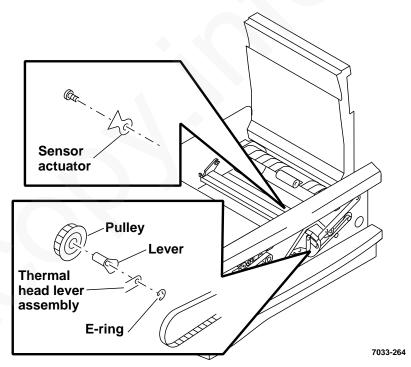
Thermal head sensor pulley, lever, and actuator removal
